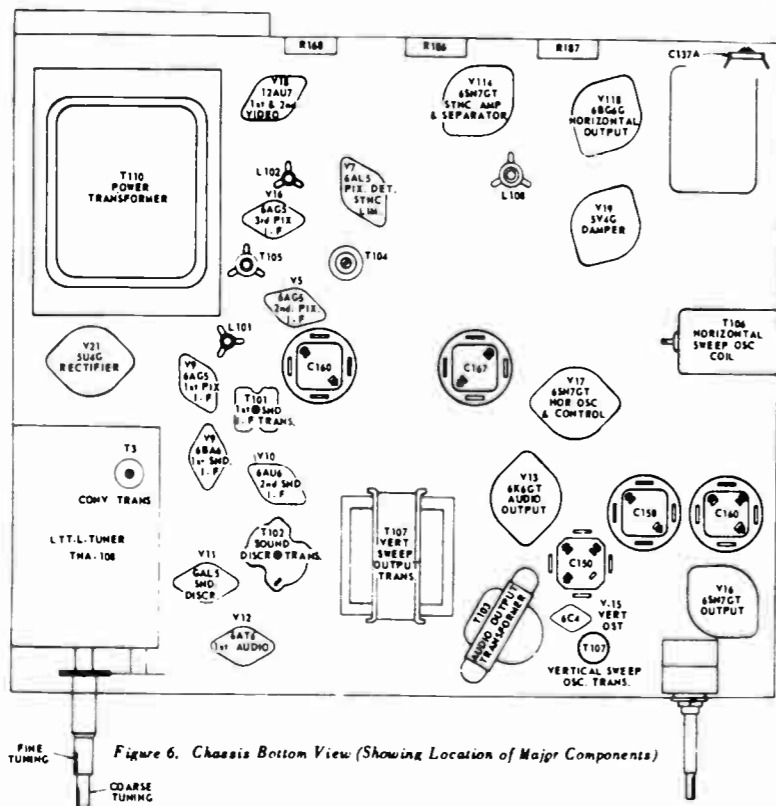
Chassis Bottom View (Showing Location of Major Components)
